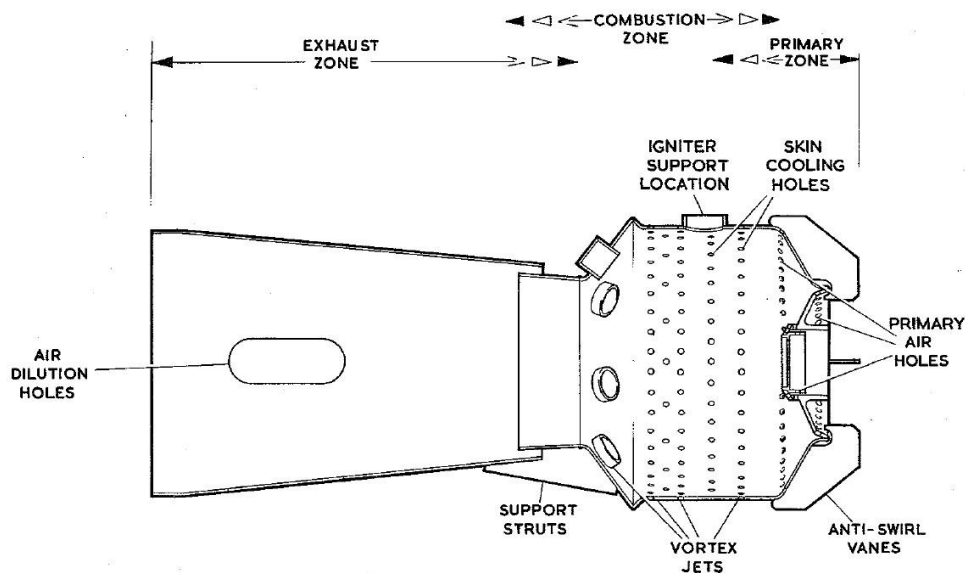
Flame tube of the Rover 1S/60 gas turbine
